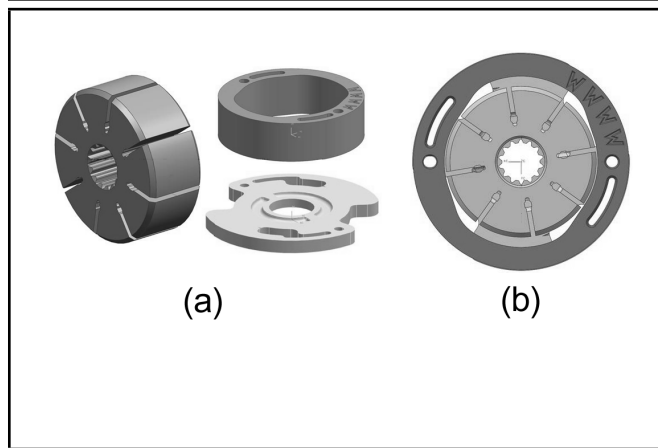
The details of the proposed new rotating group design: a) components, including rotor, cam ring, and thrust plate; and b) assembly.
